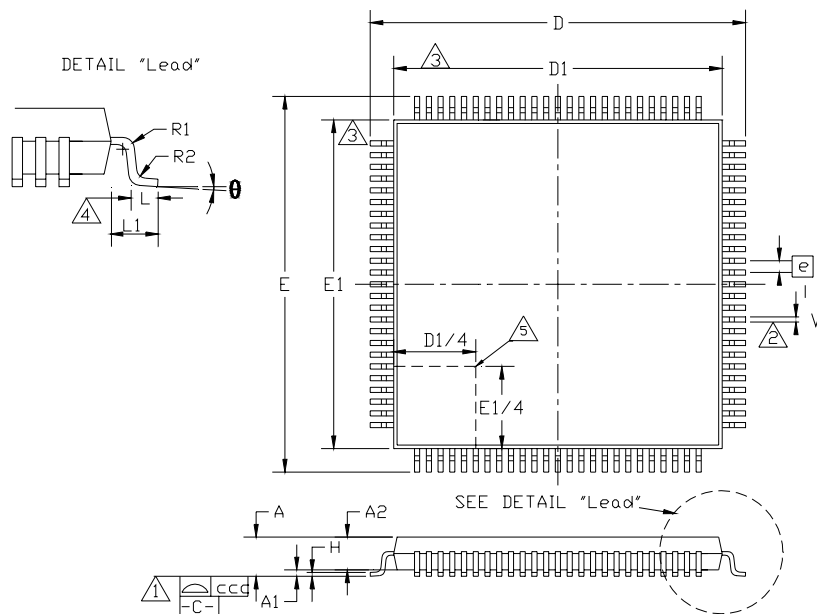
100 Pin TQFP Package Outline, 14X14X1.4 Body, 2 MM Footprint
